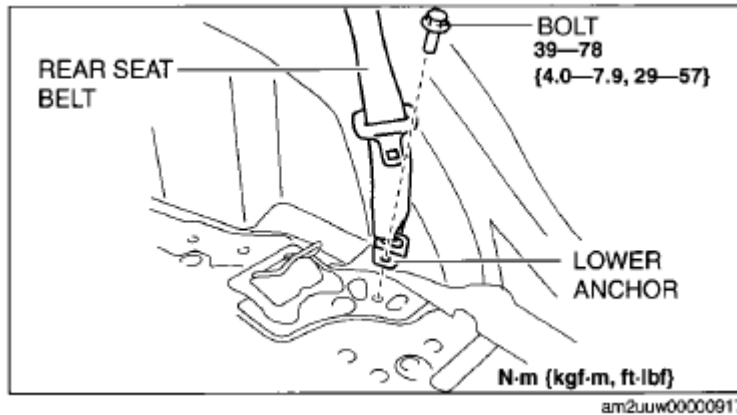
Identifying Rear Seat Belt, Lower Anchor And Bolt With Torque Specifications
